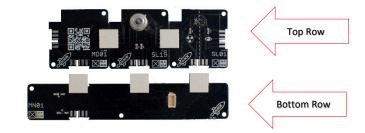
Recommended way to assemble the bottom layer is to first assemble the top and bottom row separately.
